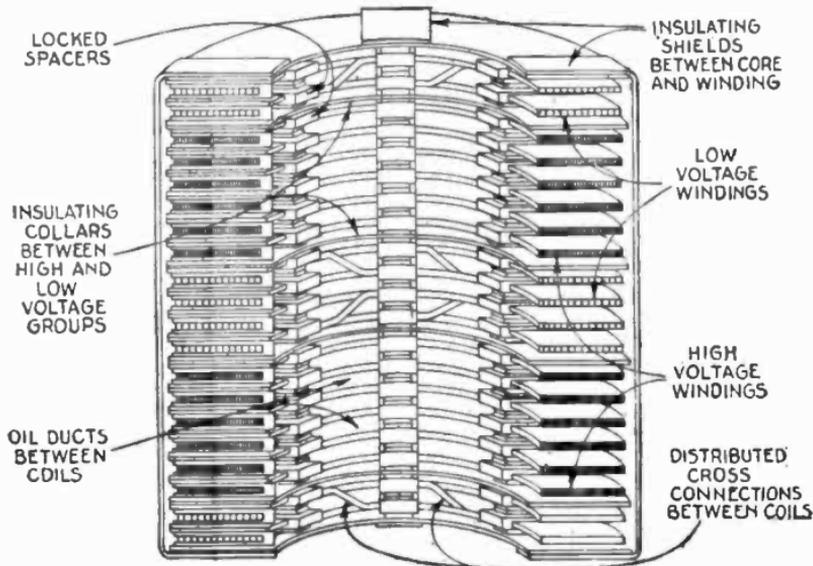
,339.—Details of coil construction of General Electric type H, form KR, transformer.
